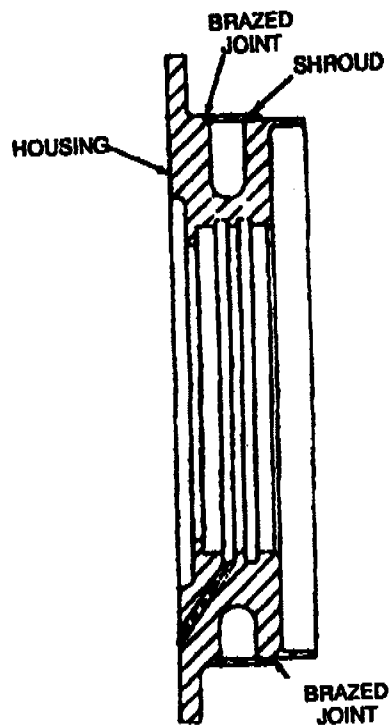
Rear Bearing Housing Inspection Areas.
